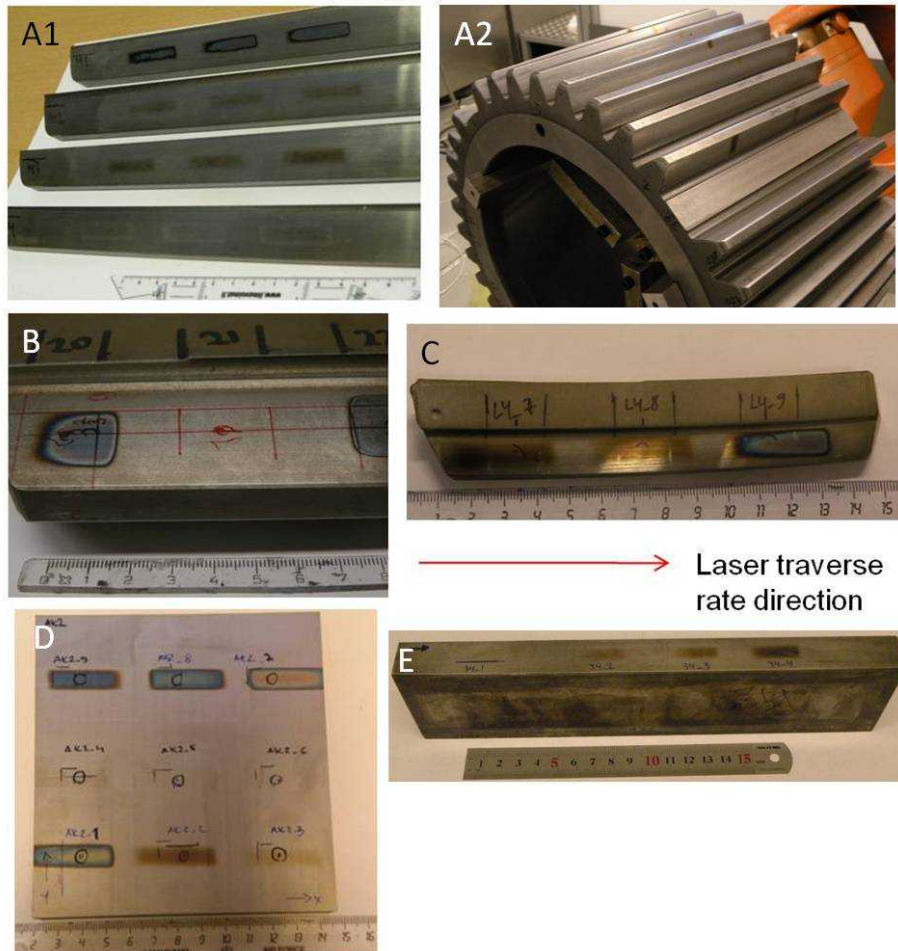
The laser-processed samples; A1) detached gear teeth, A2) planet gear, B) detached planet gear teeth, C) detached helical gear teeth, D) PM sample block and E) induction hardened sample block. [III]
